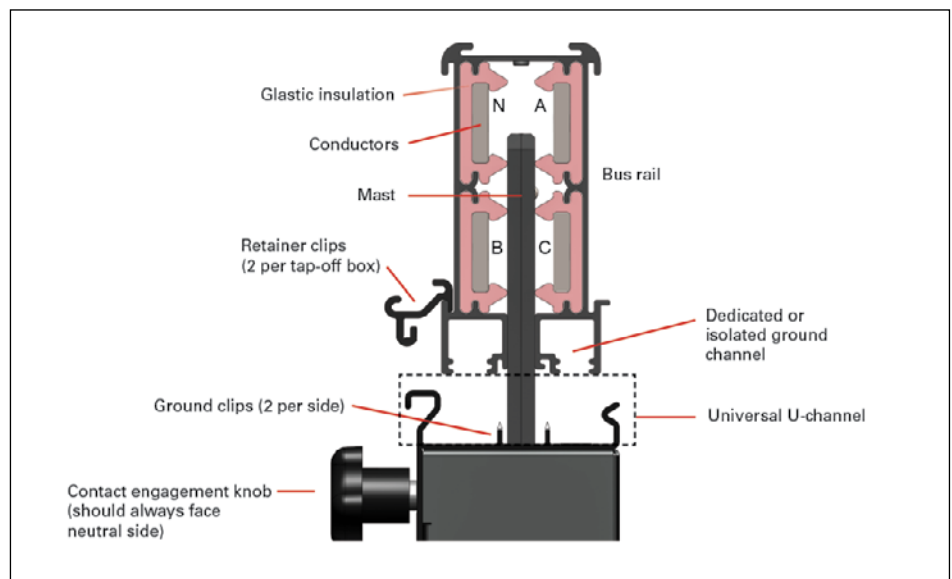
Universal U-Channel Tap-Off Box Enclosure (Side View)
